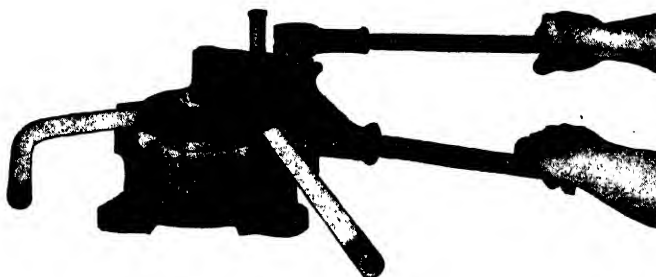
BENDING A 1-IN. STEAM PIPE USING A RATCHET-GEARED UNIVERSAL BENDER
